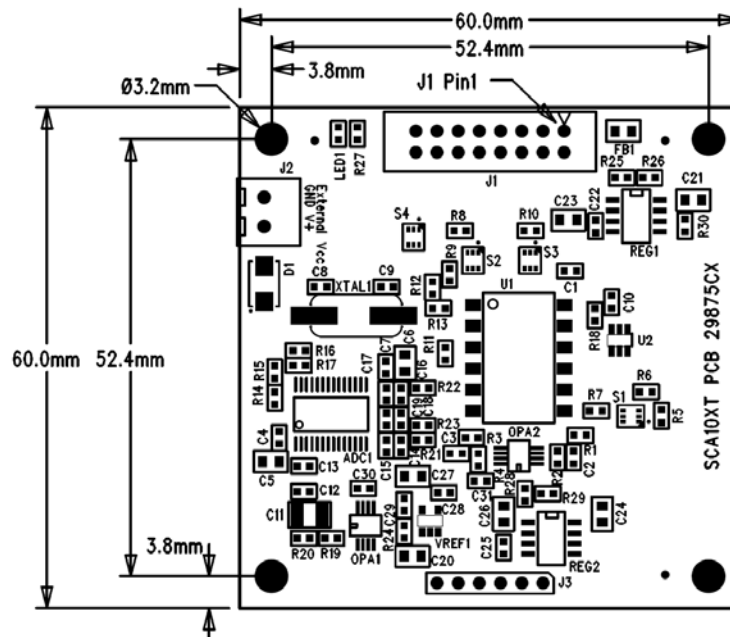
TOP view assembly drawing for SCA10xx PCB (aspect ratio not 1:1).
